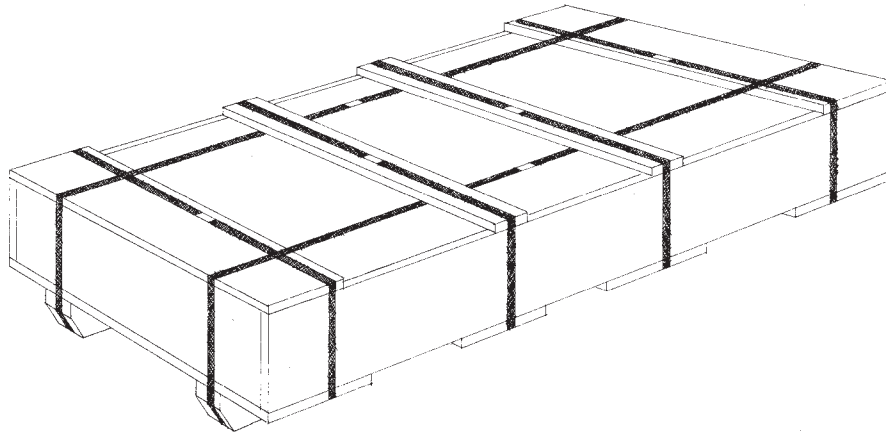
Steel Sheets in a Fully Enclosed Package on a Skeleton Platform, Using Wood Materials
